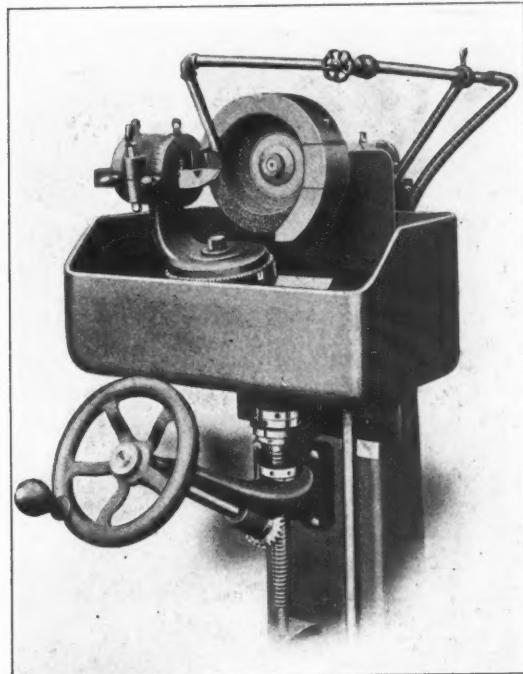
Attachment for Grinding Lathe and Planer Tools.
